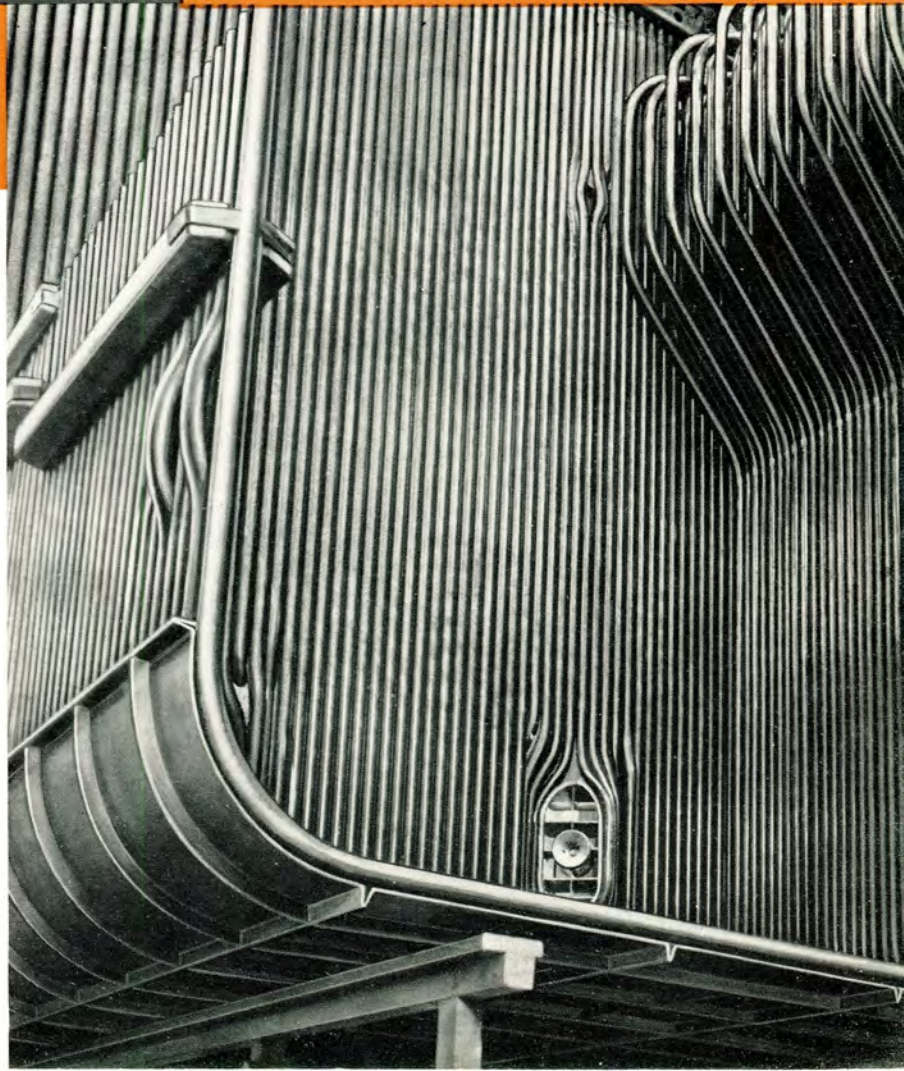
View of partly constructed furnace including sidewall panel complete with header and burners. The two panel sections which make up the rear furnace wall have been erected at the right. The lower panels of the D-tube walls comprising the floor, front wall and roof have been installed. The skin casing for the floor and lower front wall is in place.
